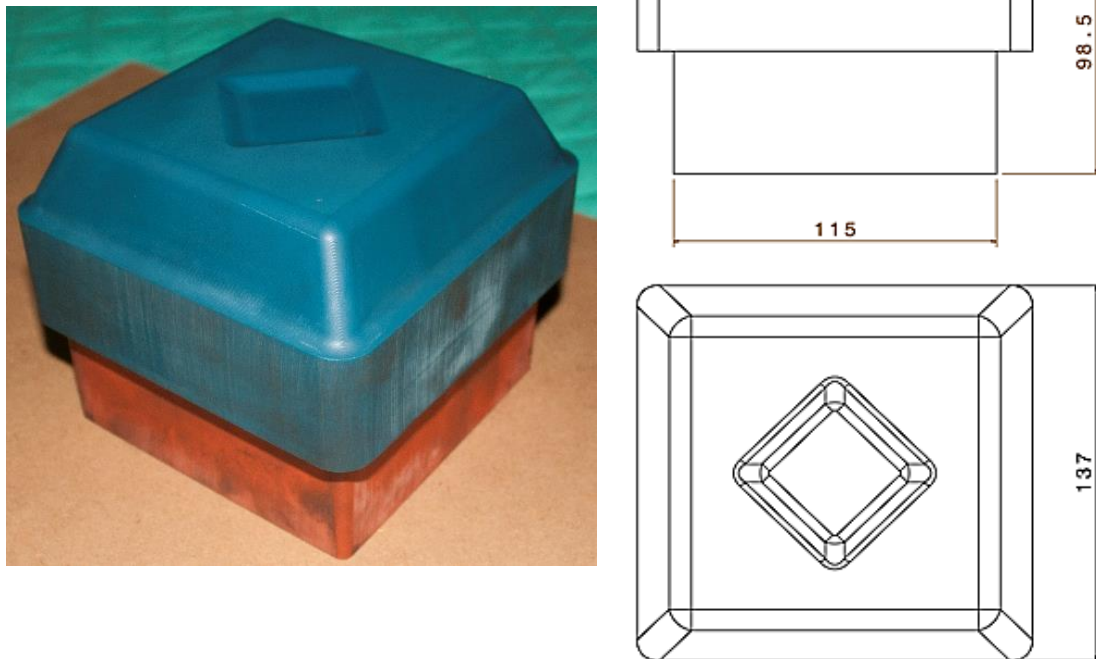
55: real view of the punch (left) and main dimensions in mm (right).
